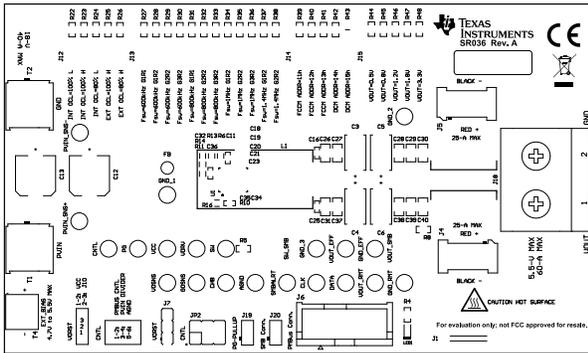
TPS546E25EVM-1PH Top Side Overlay View (Top View)
